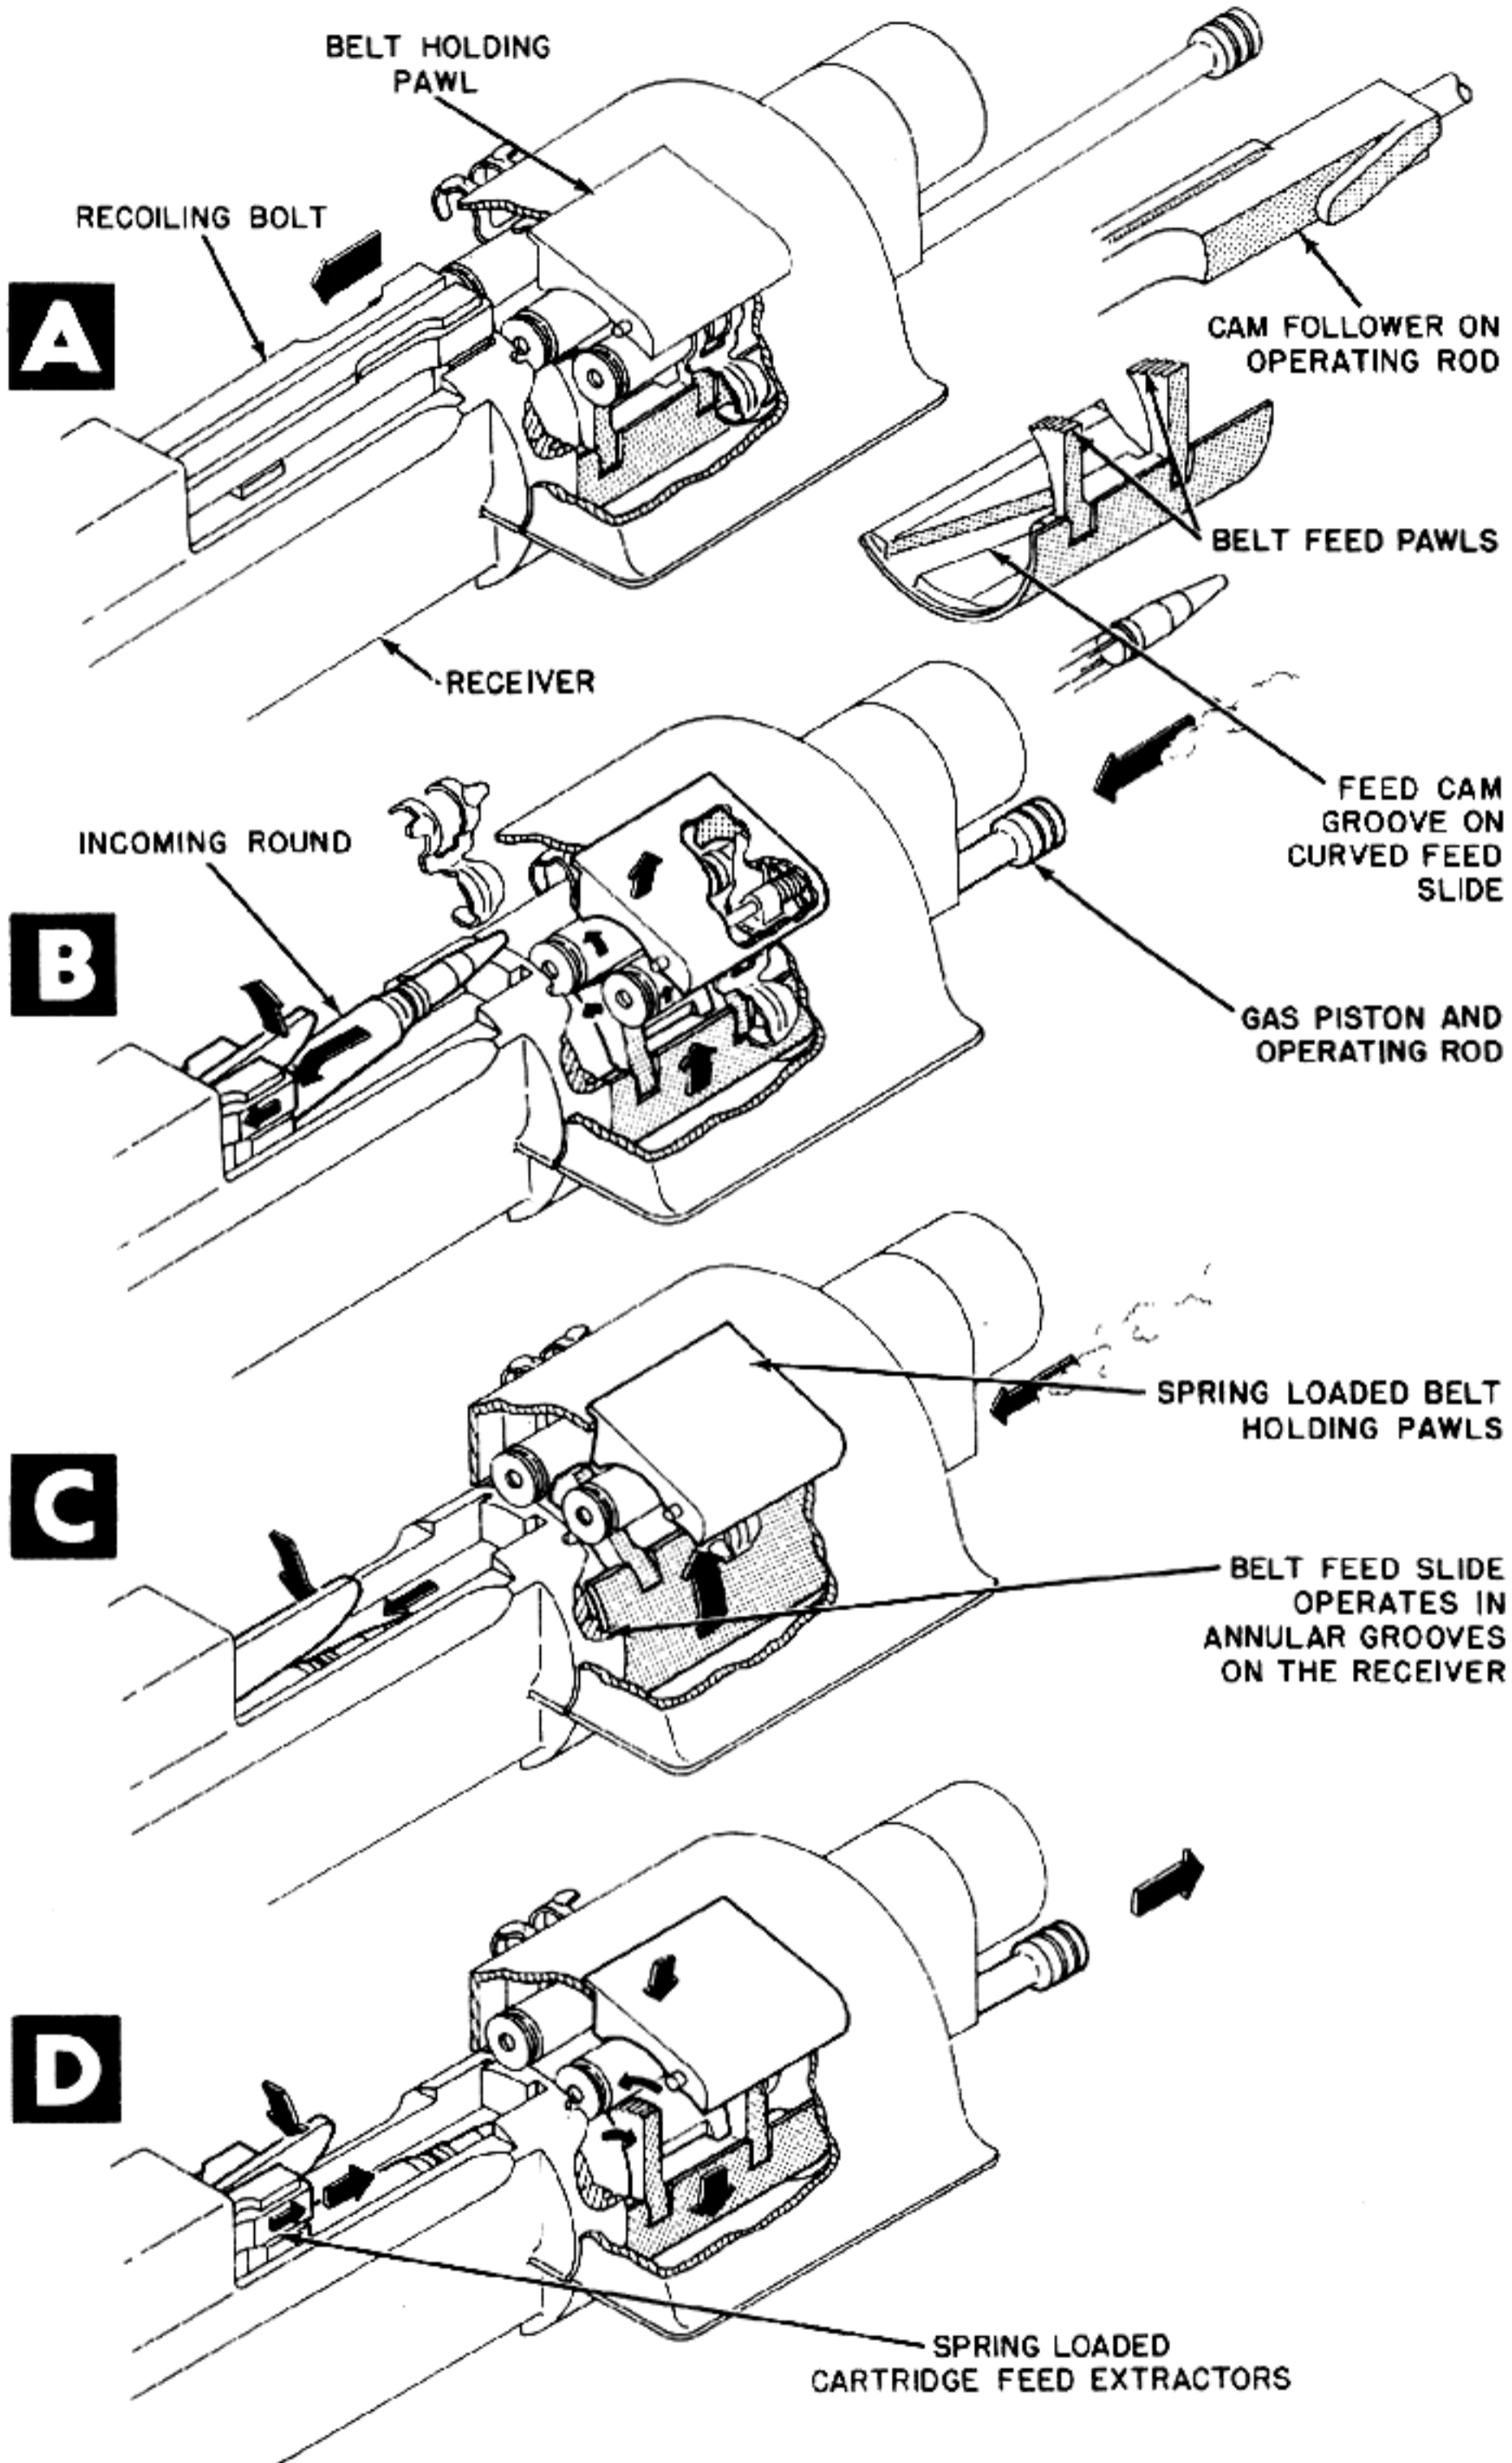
Cam on Operating Rod Rotates Belt Feed Slide.
